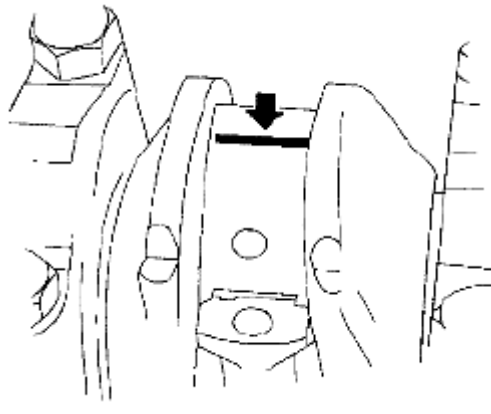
Identifying Plastic Gauging Thread To Length Of Bearing Width
